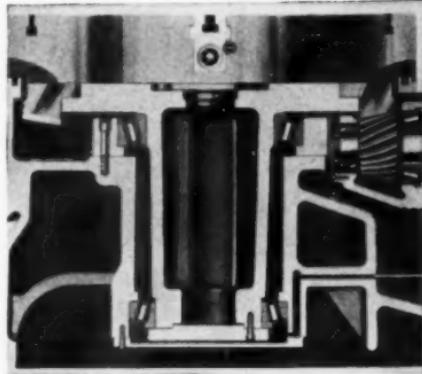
A Bullard table drive and headstock mechanism on a vertical turret lathe. Lubrication is provided by pump circulation of oil from the reservoir in the base of the bed. Note application of roller bearings and the spiral bevel drive pinions running in a bath of oil delivered under pressure.
